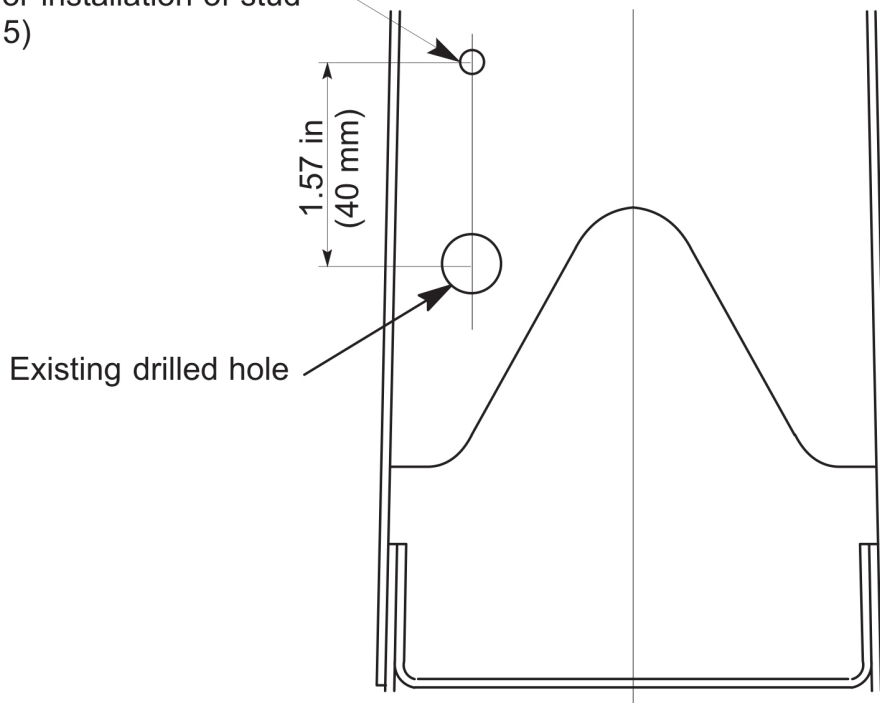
FAIRING P/N F50B319BX OR FGFB319A2 (A3) - RE-ROUTING THE WIRING - AIRCRAFT WITH WIRING ROUTED AROUND THE BACK OF FAIRING
